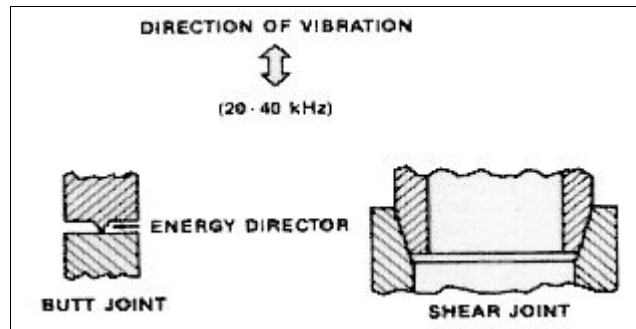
Standard joint types in ultrasonic welding (Stokes 1989).
